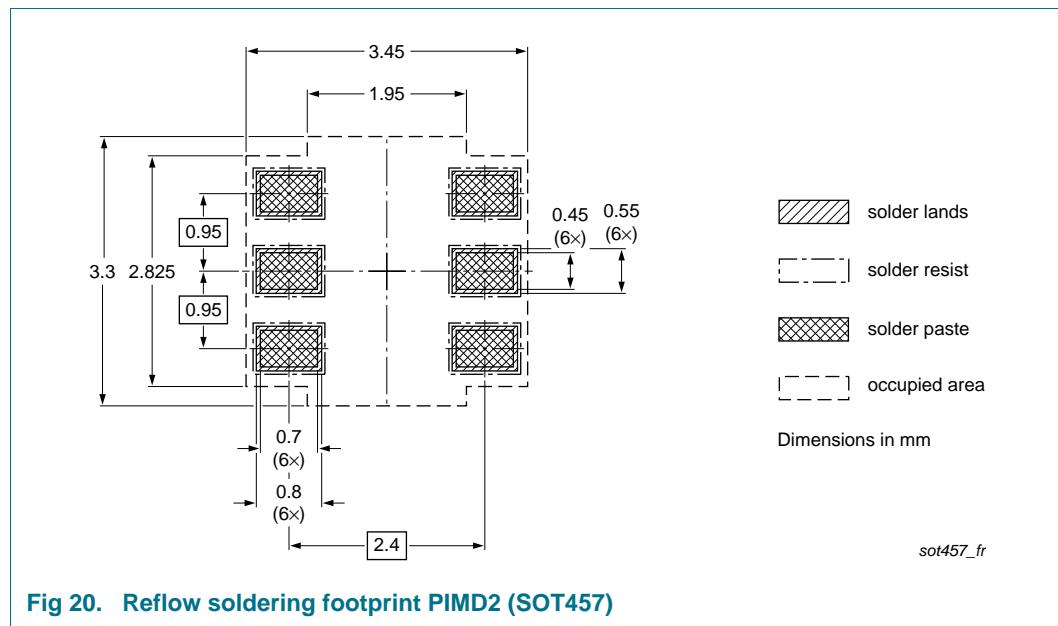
Reflow soldering footprint PIMD2 (SOT457)
